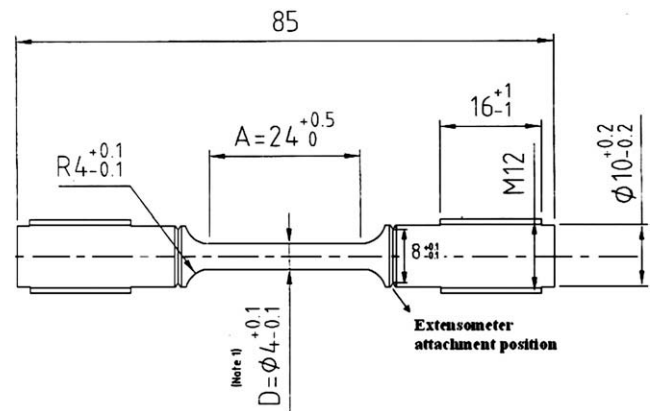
Tensile and fatigue specimen dimensions (in mm) according to ASTM-E8 and ASTM-E606.
